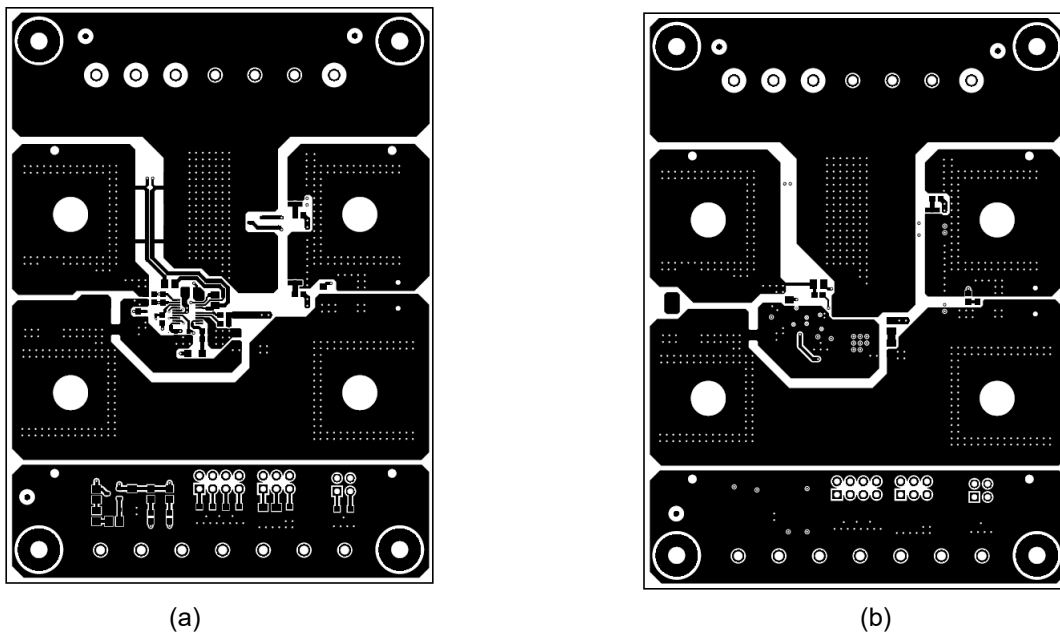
TPS48110Q1EVM Board (a) Top Layer (b) Bottom Layer
